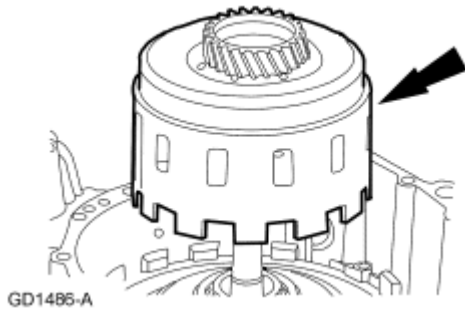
Reverse/Overdrive Sun Gear & Shell Assembly
